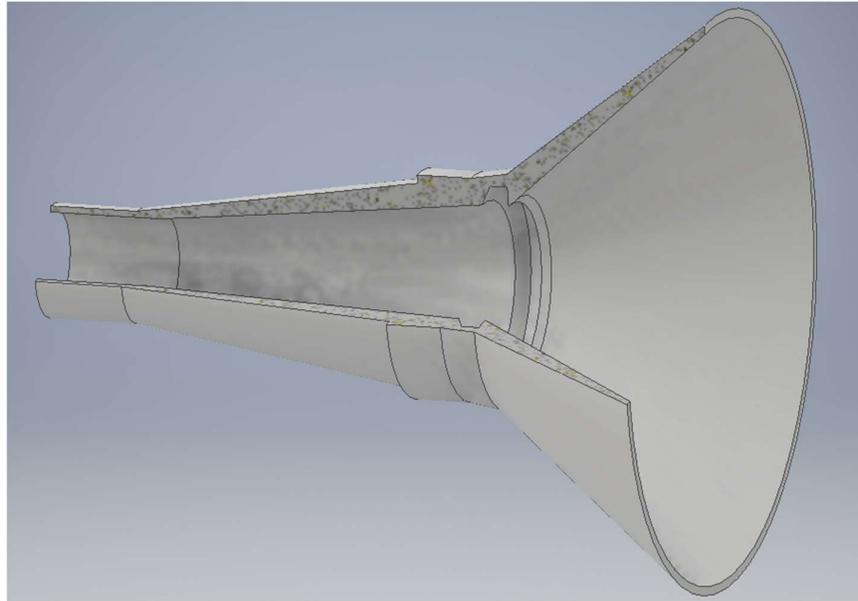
Male component, aka "piston"/probe cross sectional profile
